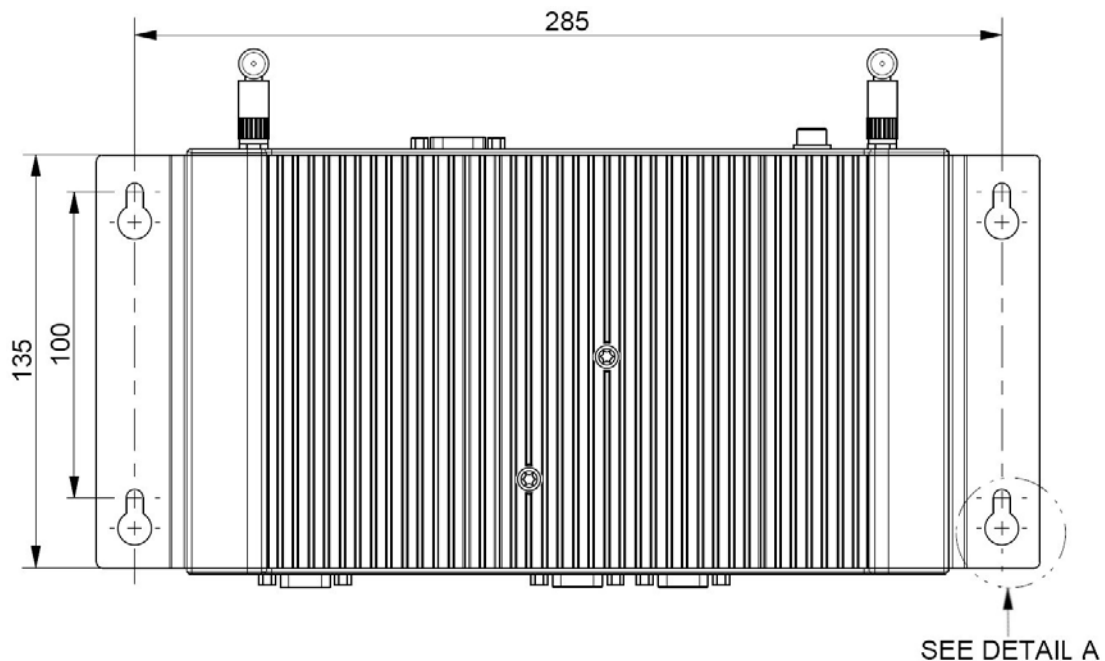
CB 511 with mounting brackets installed in order to have the device interface side with antenna upwards
